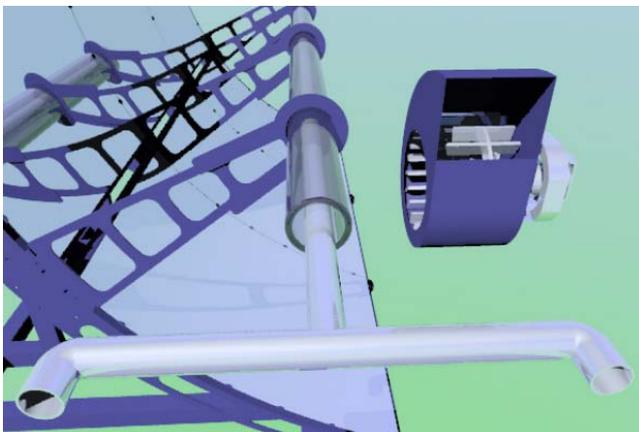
Detail of parts needed to attach reflector and vacuum glass tube.
